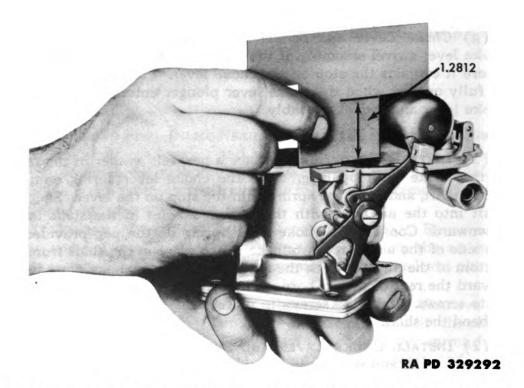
Checking Carburetor Float With Fuel Inlet Needle Closed
